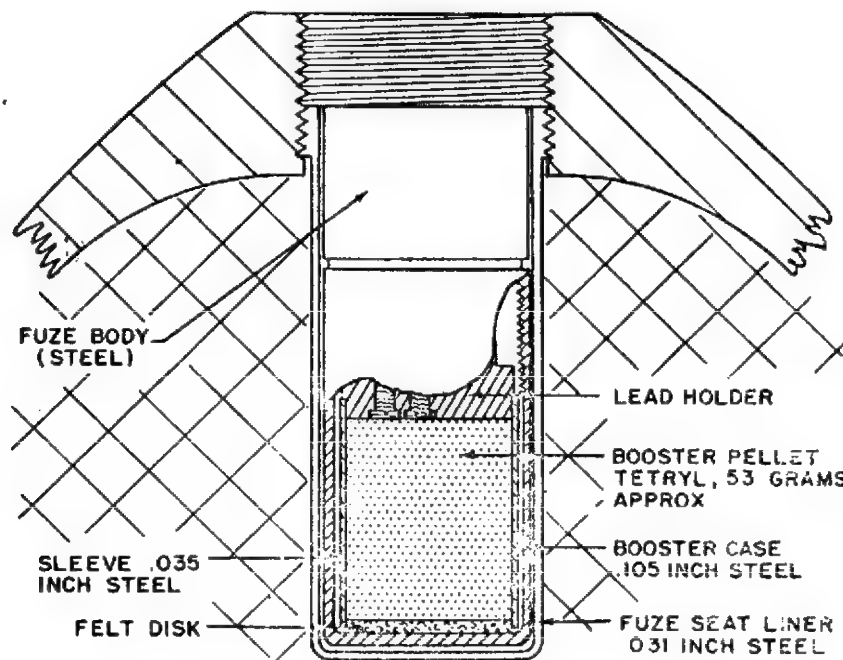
BOOSTER ASSEMBLY FOR BOMB FUZE,
